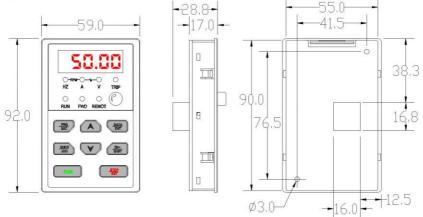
C10 Keyboard dimension C10 series(0.75-4KW) (mm)
